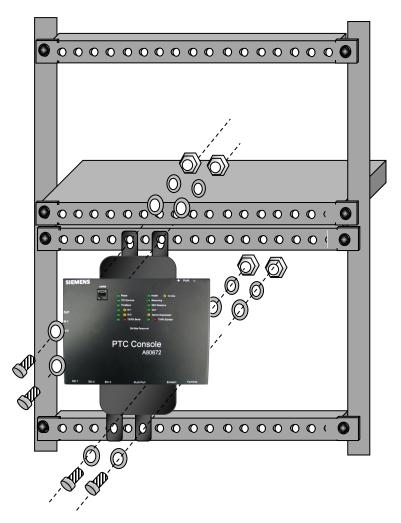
Mounting the PTC Console to a Rack Assembly
